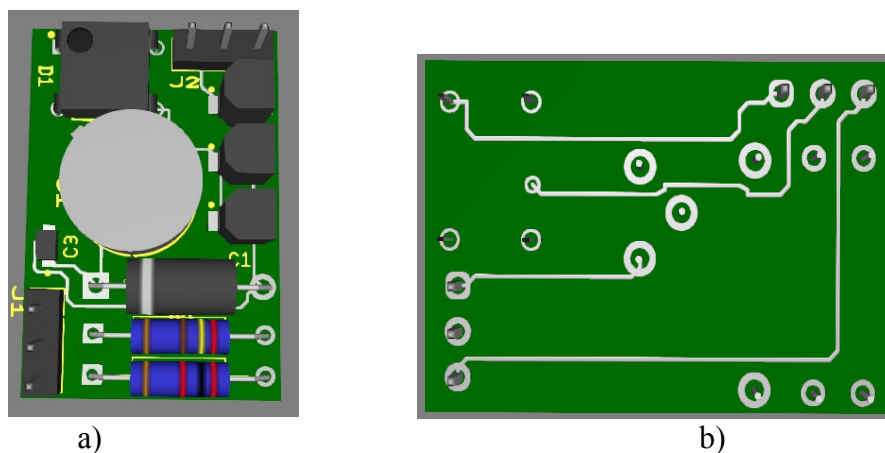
3D model of the information processing PCB in the Ultiboard program, a) top view; b) bottom view
